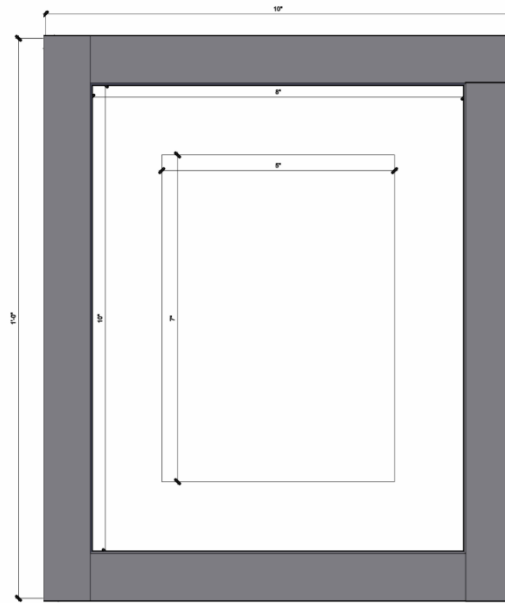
shows an AutoCAD drawing of the picture frames (Generated by Grace Johnson)
